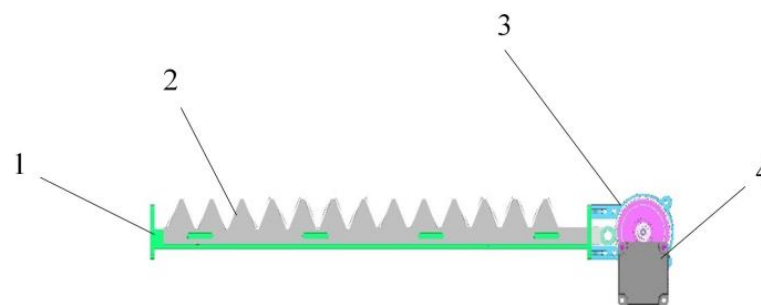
The structure drawing of the reciprocating cutter system: 1—cutter holder; 2—cutter; 3—transmission mechanism; 4—motor.
